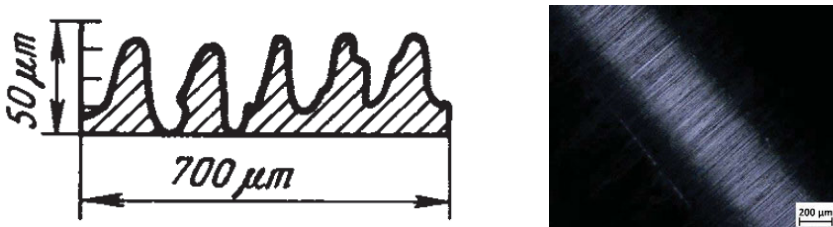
Surface roughness as illustrated by Kazakov [5] (left) and surface roughness found (right) as a result of using pointy lathe tools for fabrication
